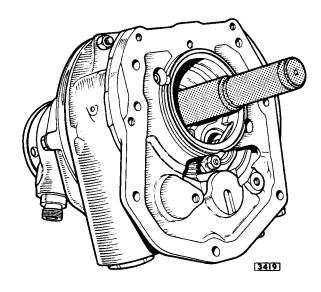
Using the dummy mainshaft Tool No. L.185A
